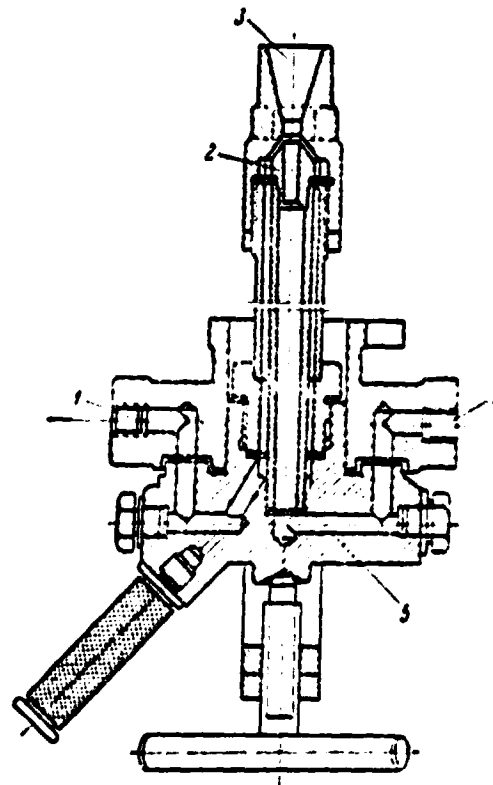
Pneumatic (or steam) ejection type spray nozzle.
